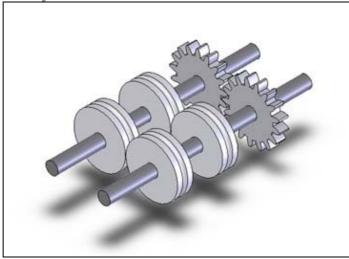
Shafts are connected with gears and one of them are actuated with motor
